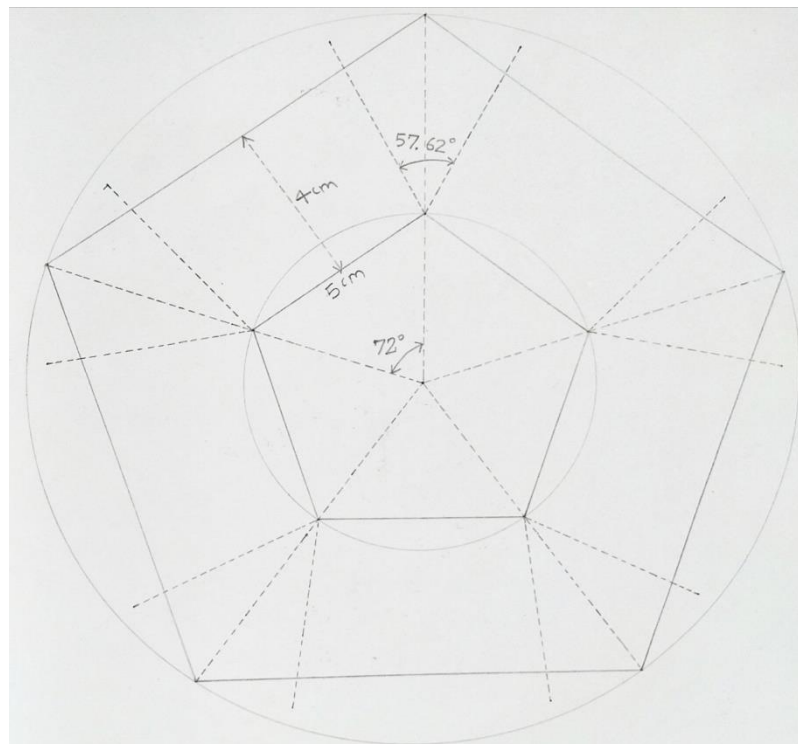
Complete drawing on the sheet of paper to make desired pyramidal flat container with regular pentagonal base from a circular sheet of radius 9.2 cm
